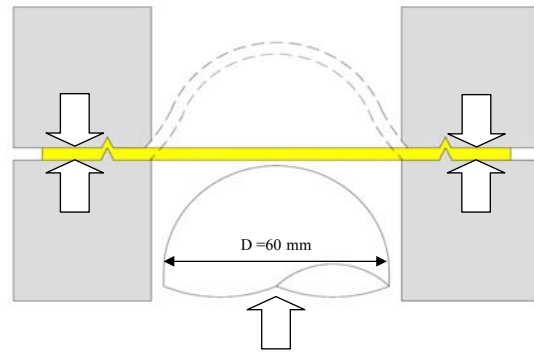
2 Tinius-Olsen BUP 200 Ductomatic sheet metal testing machine
